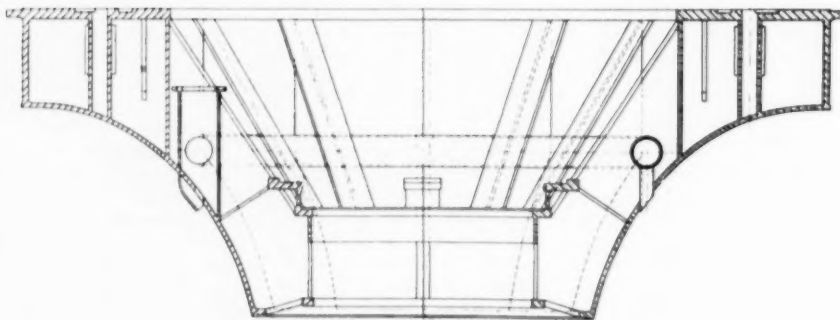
WELD-FABRICATED INNER HEAD COVER FOR McNARY
